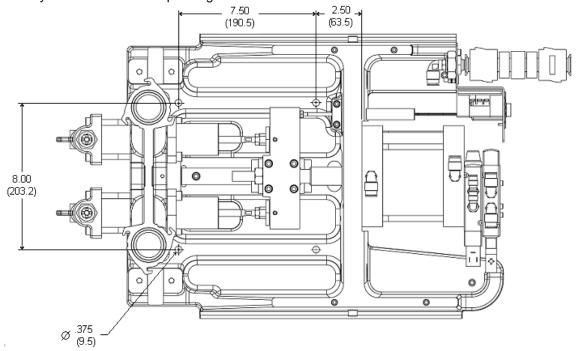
Mounting Hole Dimensions for Installing the PR70 Machine (dimensions in inches/mm)
